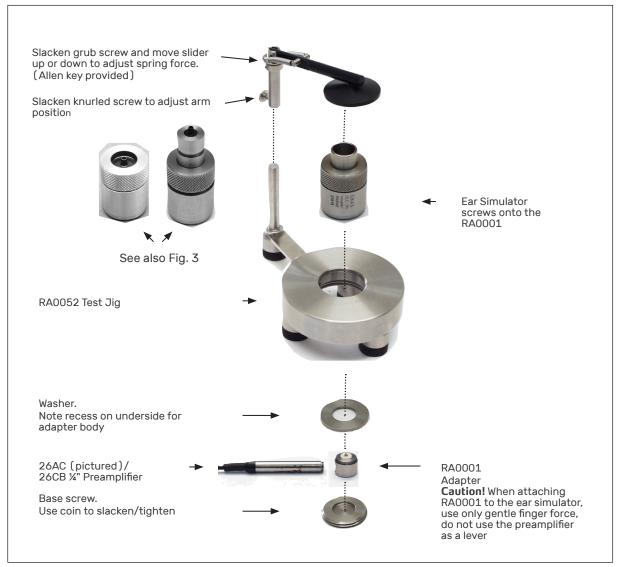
Exploded view of the user-serviceable components of the 43AC Ear Simulator Kit
